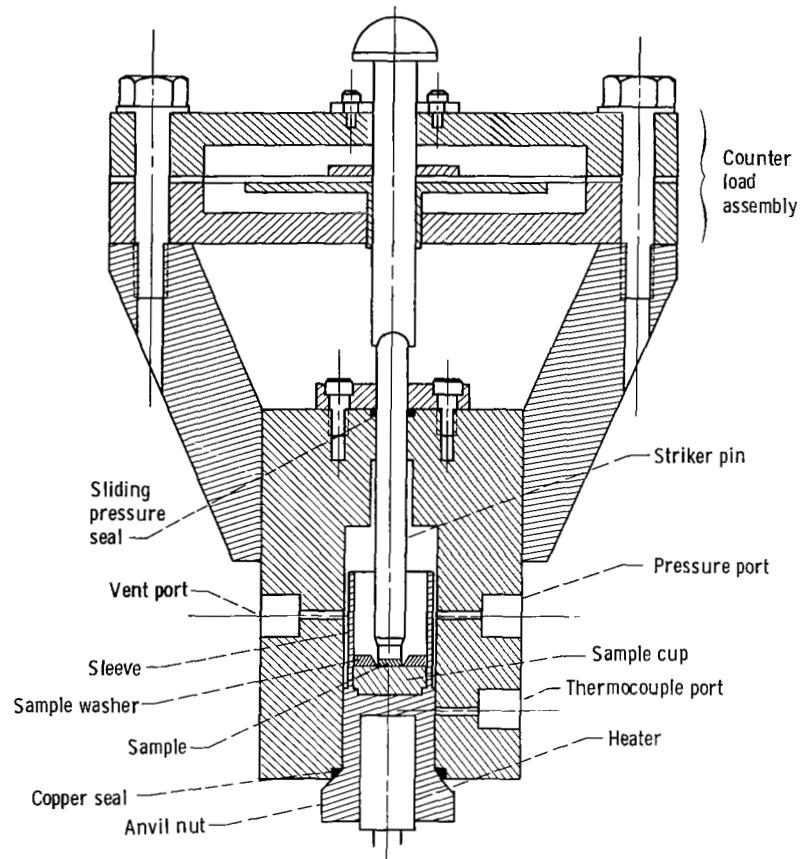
White Sands Test Facility mechanical impact test chamber - sample-washer configuration. Dimensions of sample washer: outside diameter, 2.281 cm (0.898 in.); inside diameter at 45°, 0.660 cm (0.260 in.); thickness, 0.254 cm (0.100 in.).
